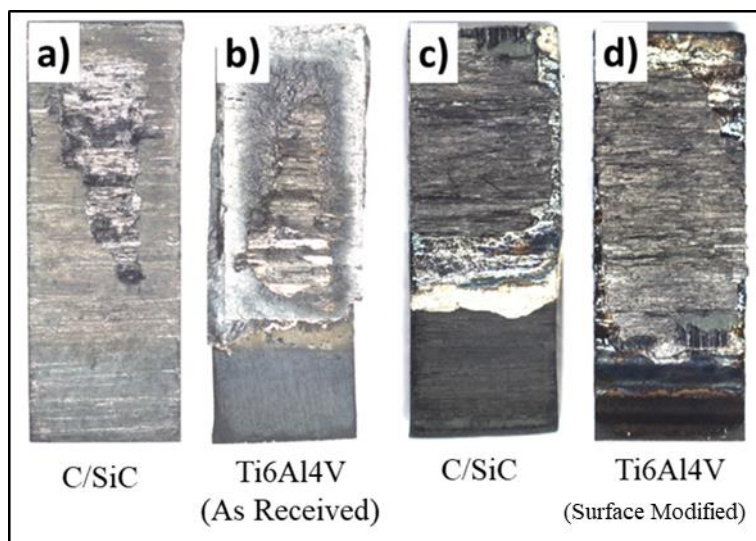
Macrographs of post SLO fracture surfaces of (a) and (b) C/SiC-CusilABA-Ti6Al4V and (c) and (d) C/SiC-CusilABA-Surface modified Ti6Al4V bonded specimens.
